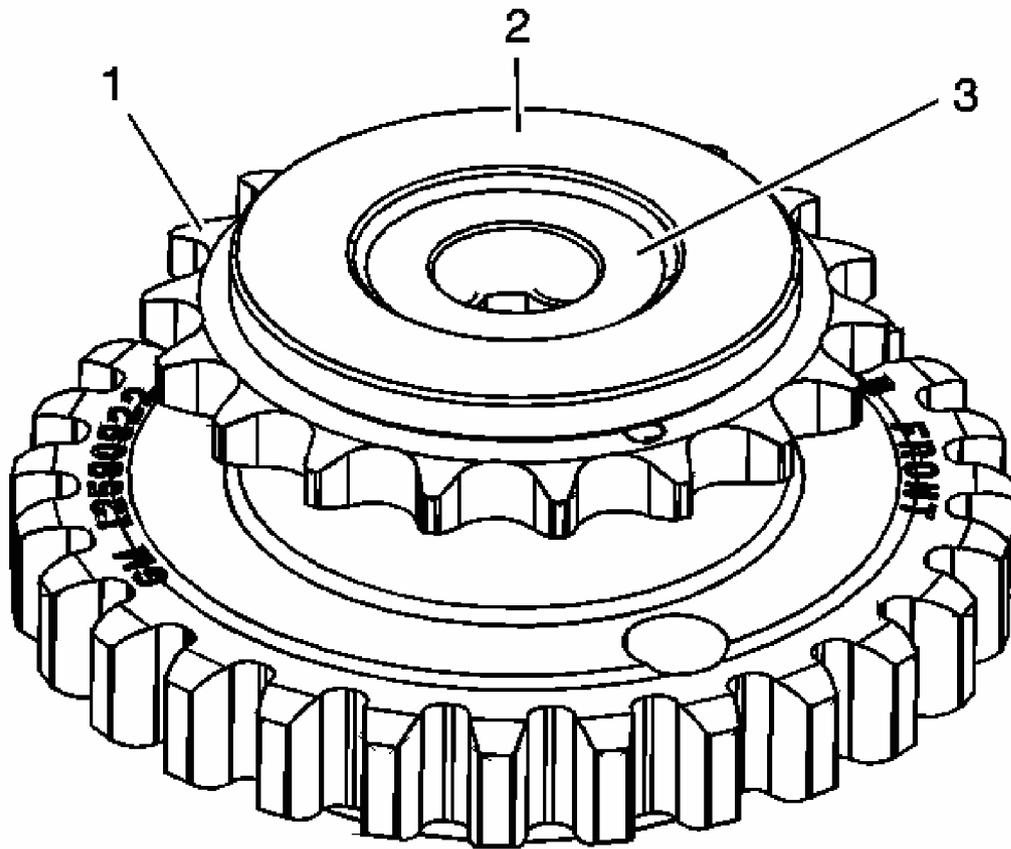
Identifying Front Of Right Intermediate Sprocket Inspection Areas
